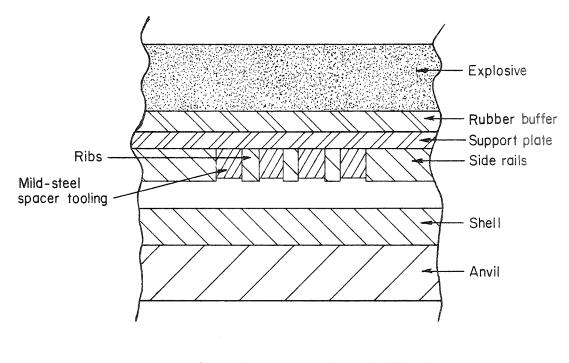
INTEGRAL-RIB METHOD FOR RIB-TO-SHELL WELDING
